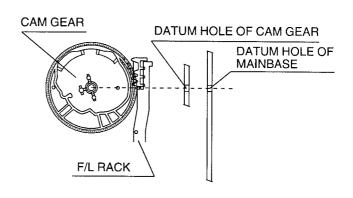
ASSEMBLY OF THE CAM GEAR & F/L RACK
